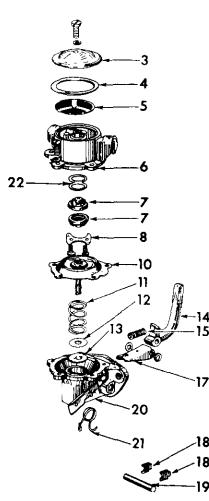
Exploded view of fuel pump used on late Series B-275 and all Series B-414, 354, 364 and 384 tractors. Diesel and nondiesel pumps are similar.
